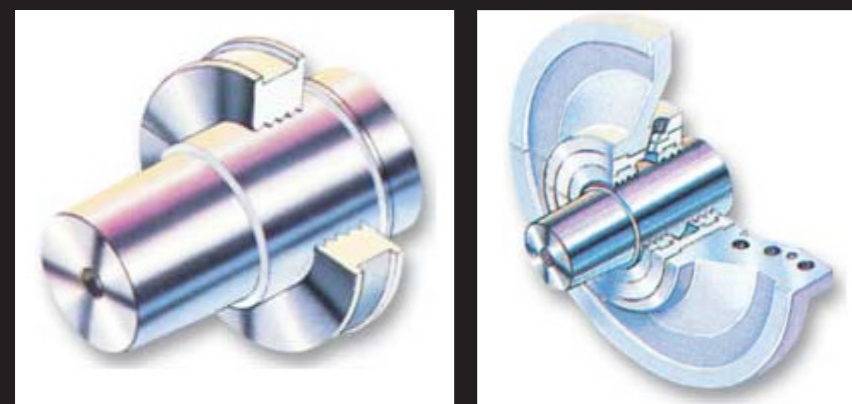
TRADITIONAL COMPRESSOR SEAL DESIGNS
